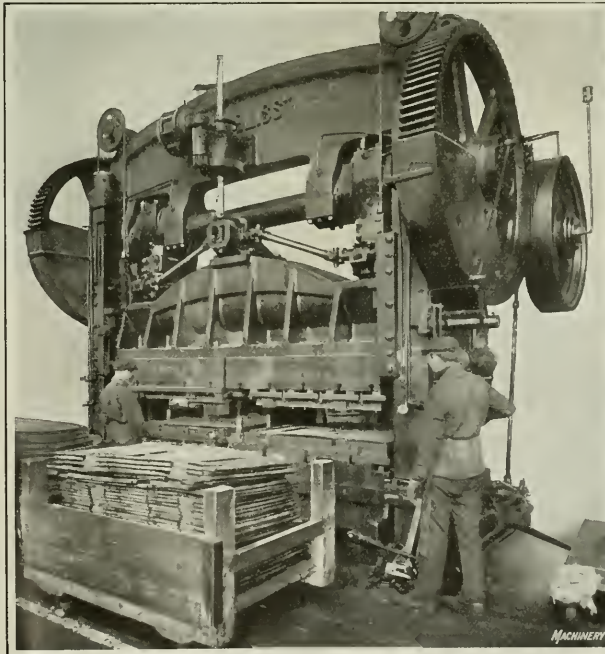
Large Single-action Double-crank Press used for blanking and flanging a Part at One Stroke
